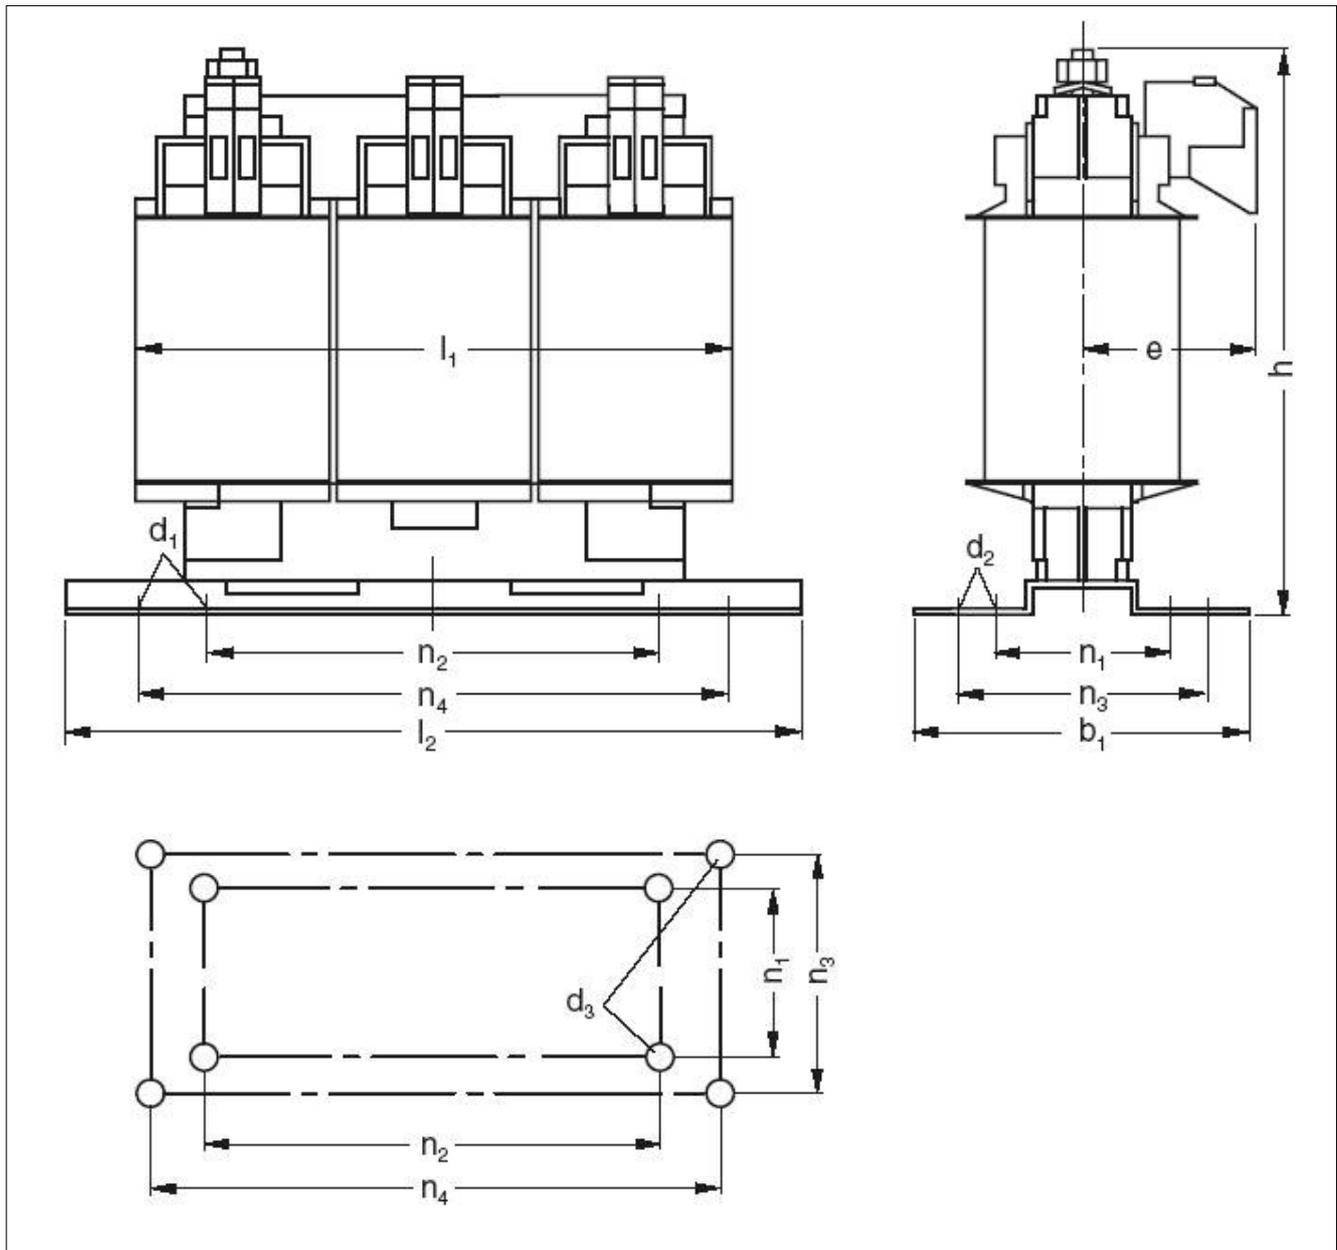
Dimension drawing and mounting hole of motor reactor 9 A (6SL3000-2BE21-0AA0)
